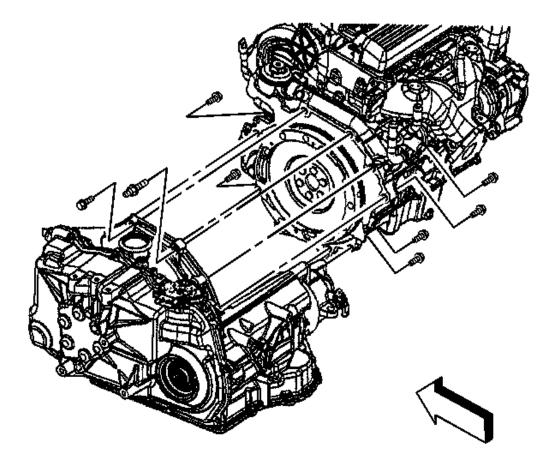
Transaxle To Engine Bolts/Stud Courtesy of GENERAL MOTORS CORP.
